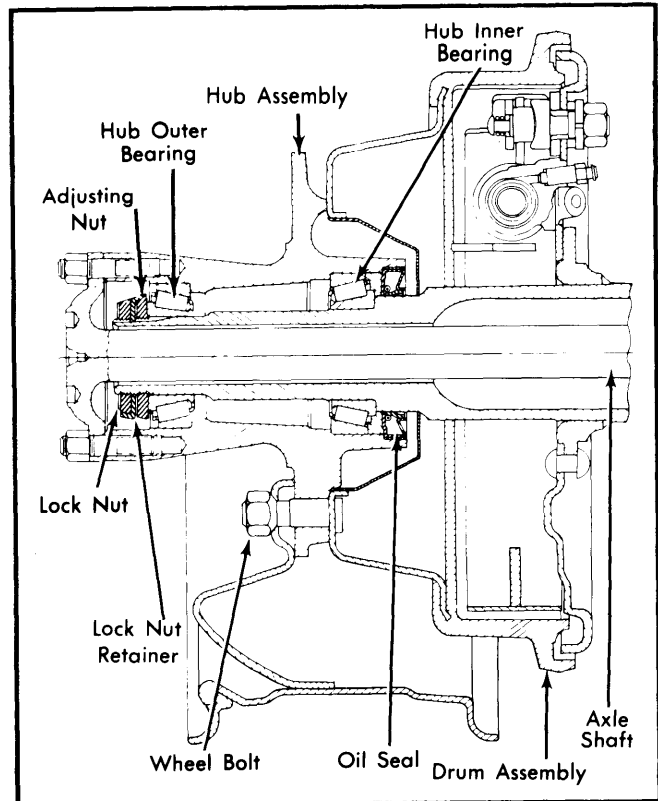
Sectional View of Axle Shaft and Bearings With Machined Shoulder Bearing Retainer
